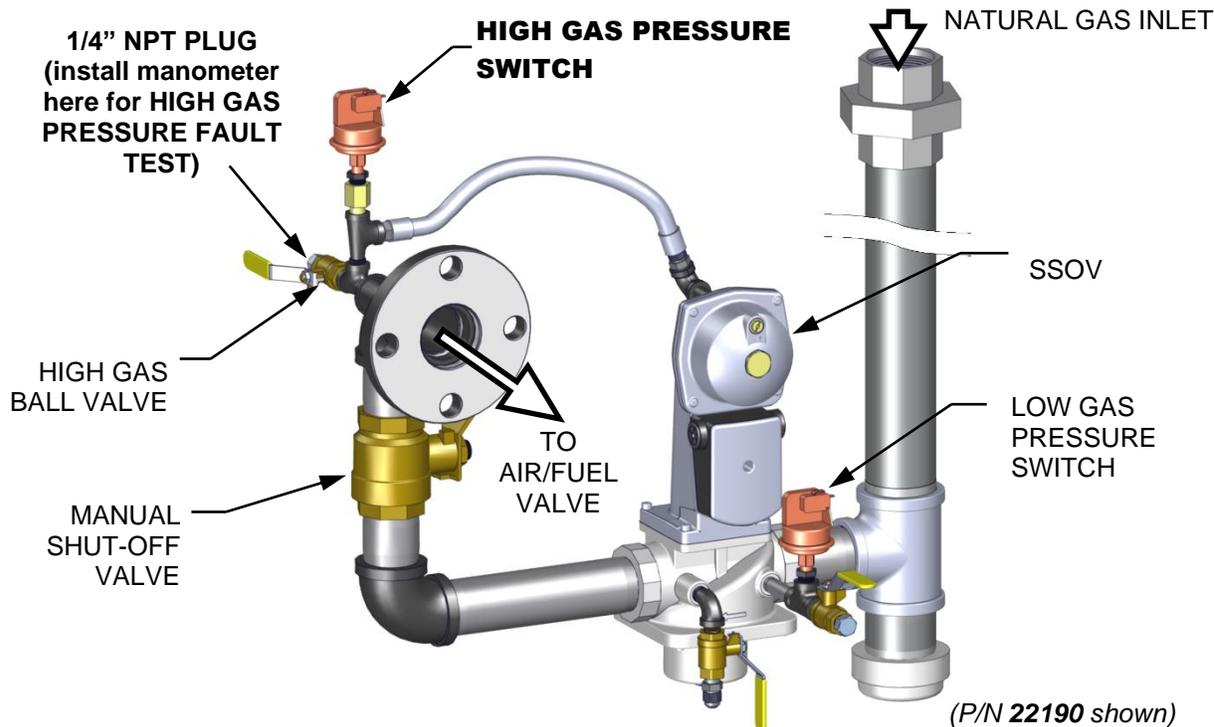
BMK750/1000 HIGH Gas Pressure Test Components
